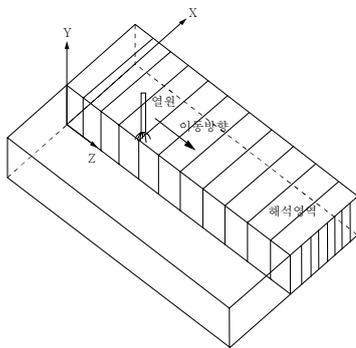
Solution domain of 3-dimensional analysis in bead-on-plate GTA welding
